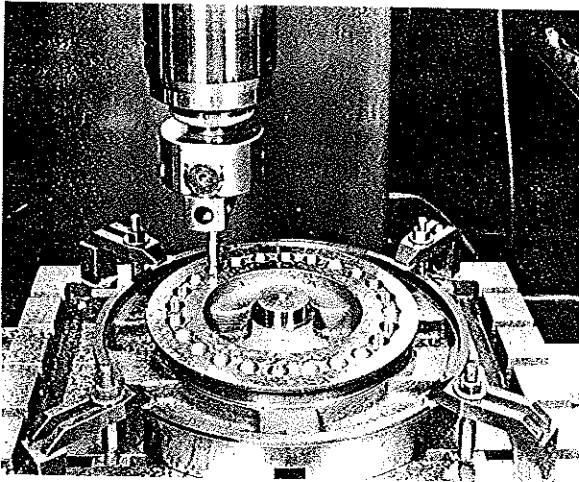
Boring holes with tolerance of .0002. Courtesy Kearney and Trecker.
